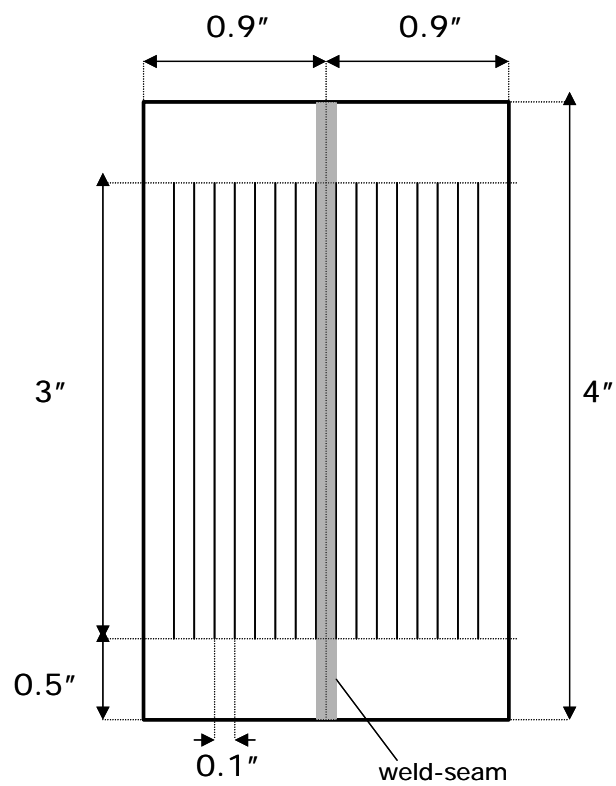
Schematic of how weld-samples were cut from welded plates
